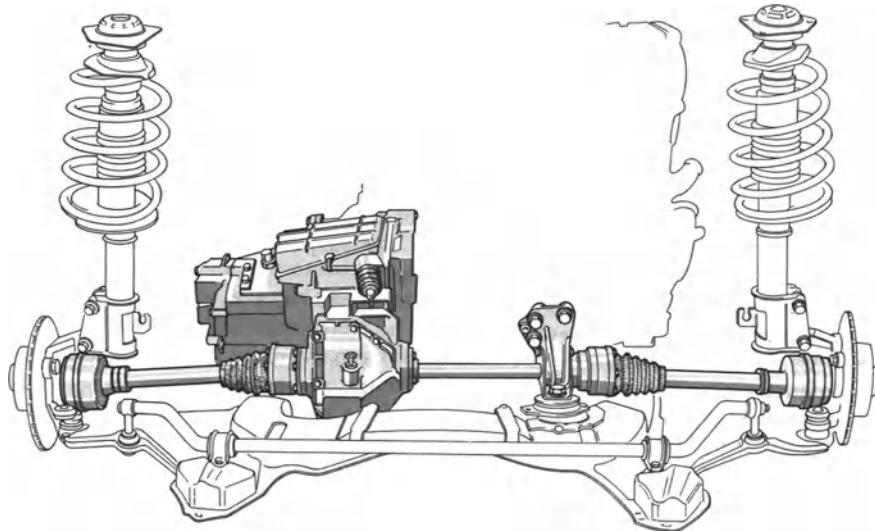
Complete transmission for a mid-size front-wheels drive car with transversal engine; the transmission is seen from the back. (courtesy of FIAT)
